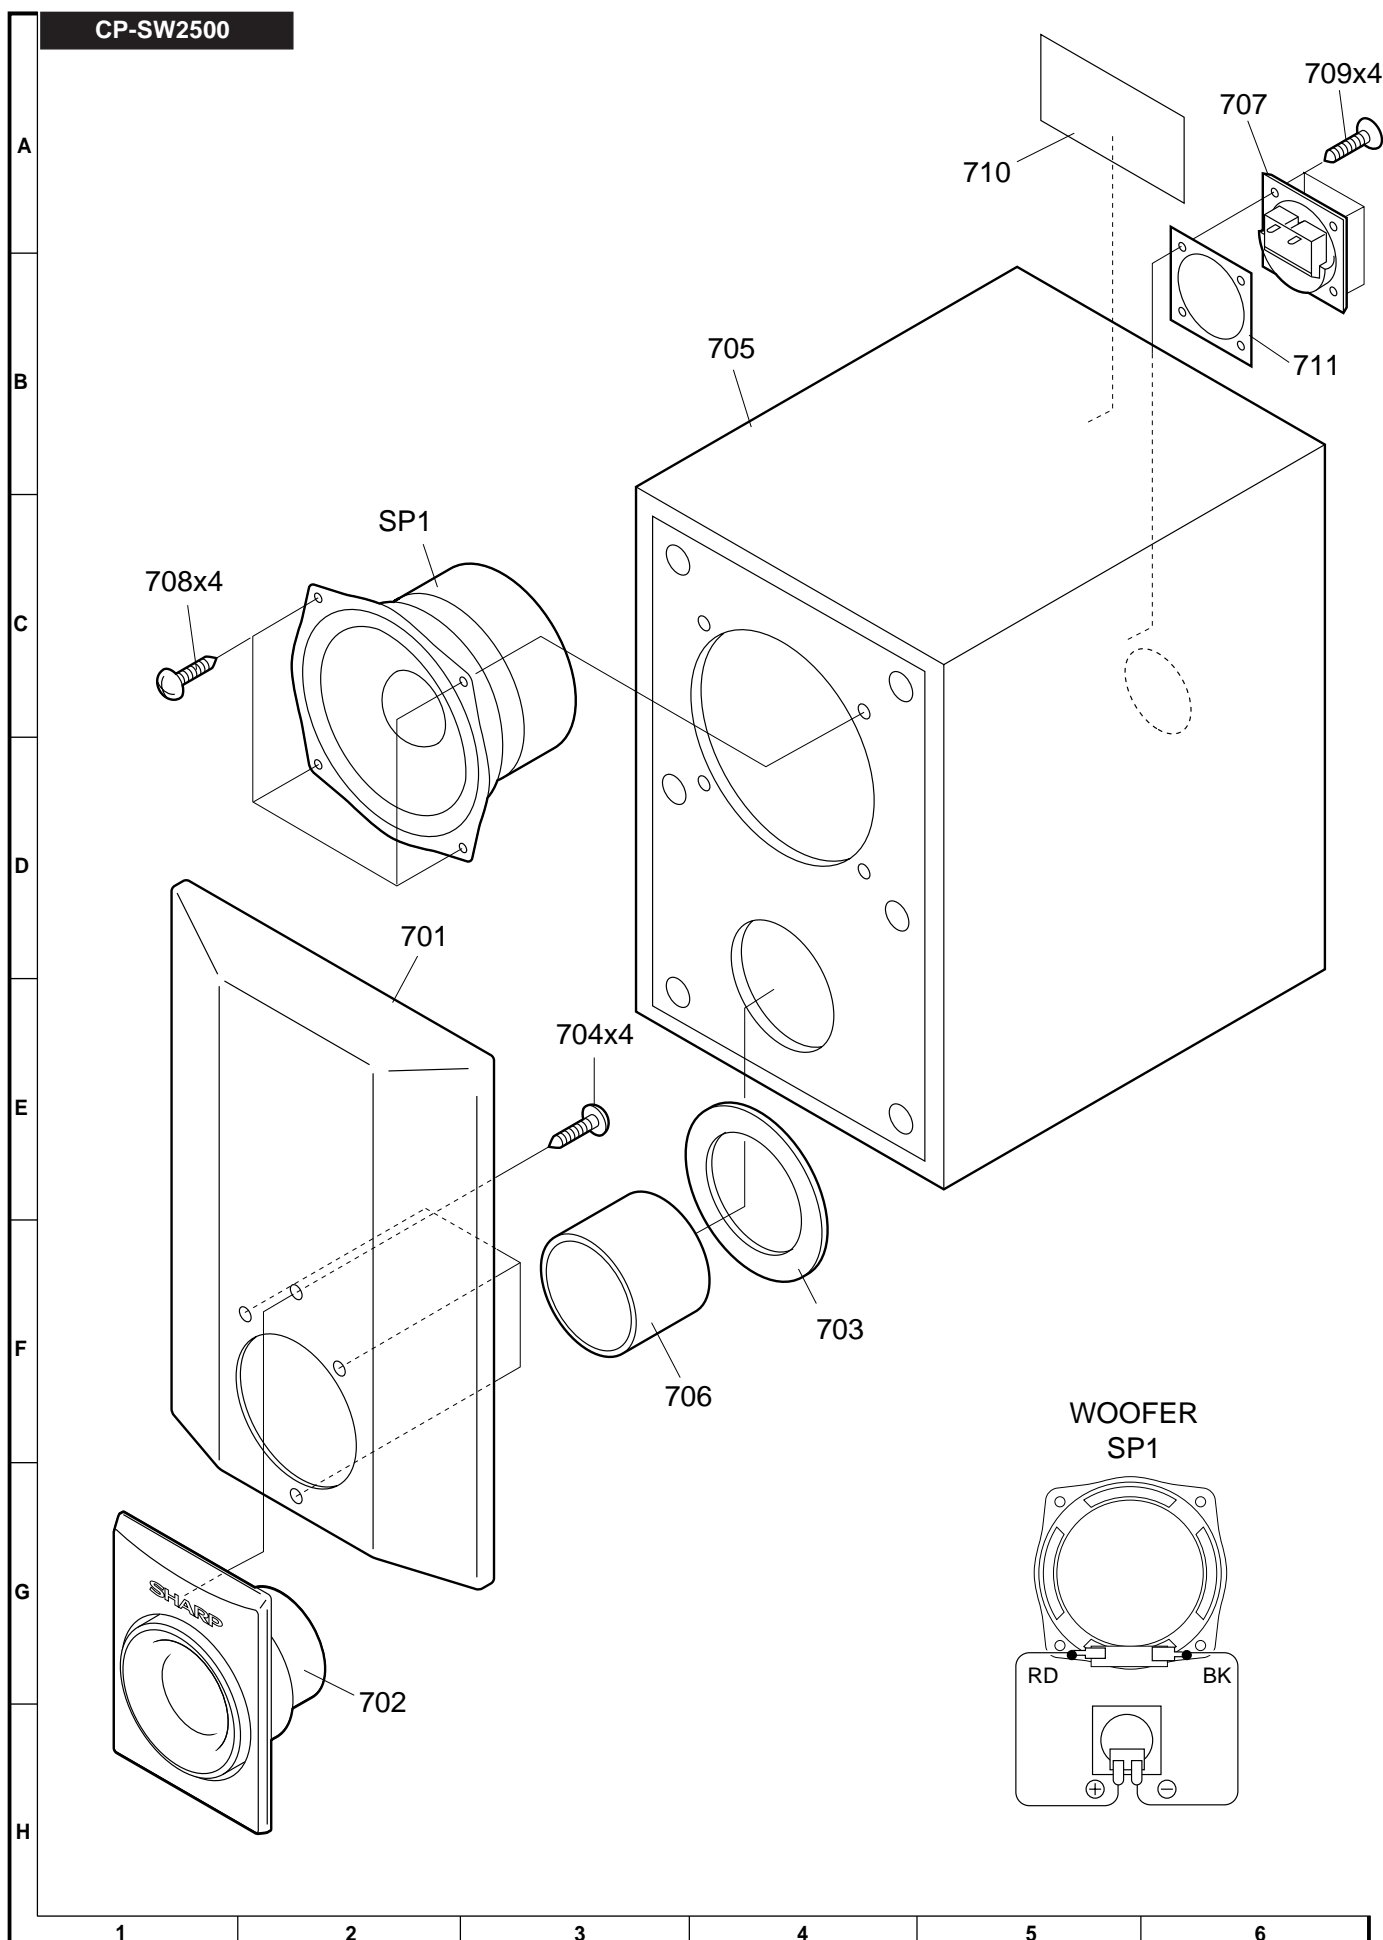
SPEAKER EXPLODED VIEW (2/3)
